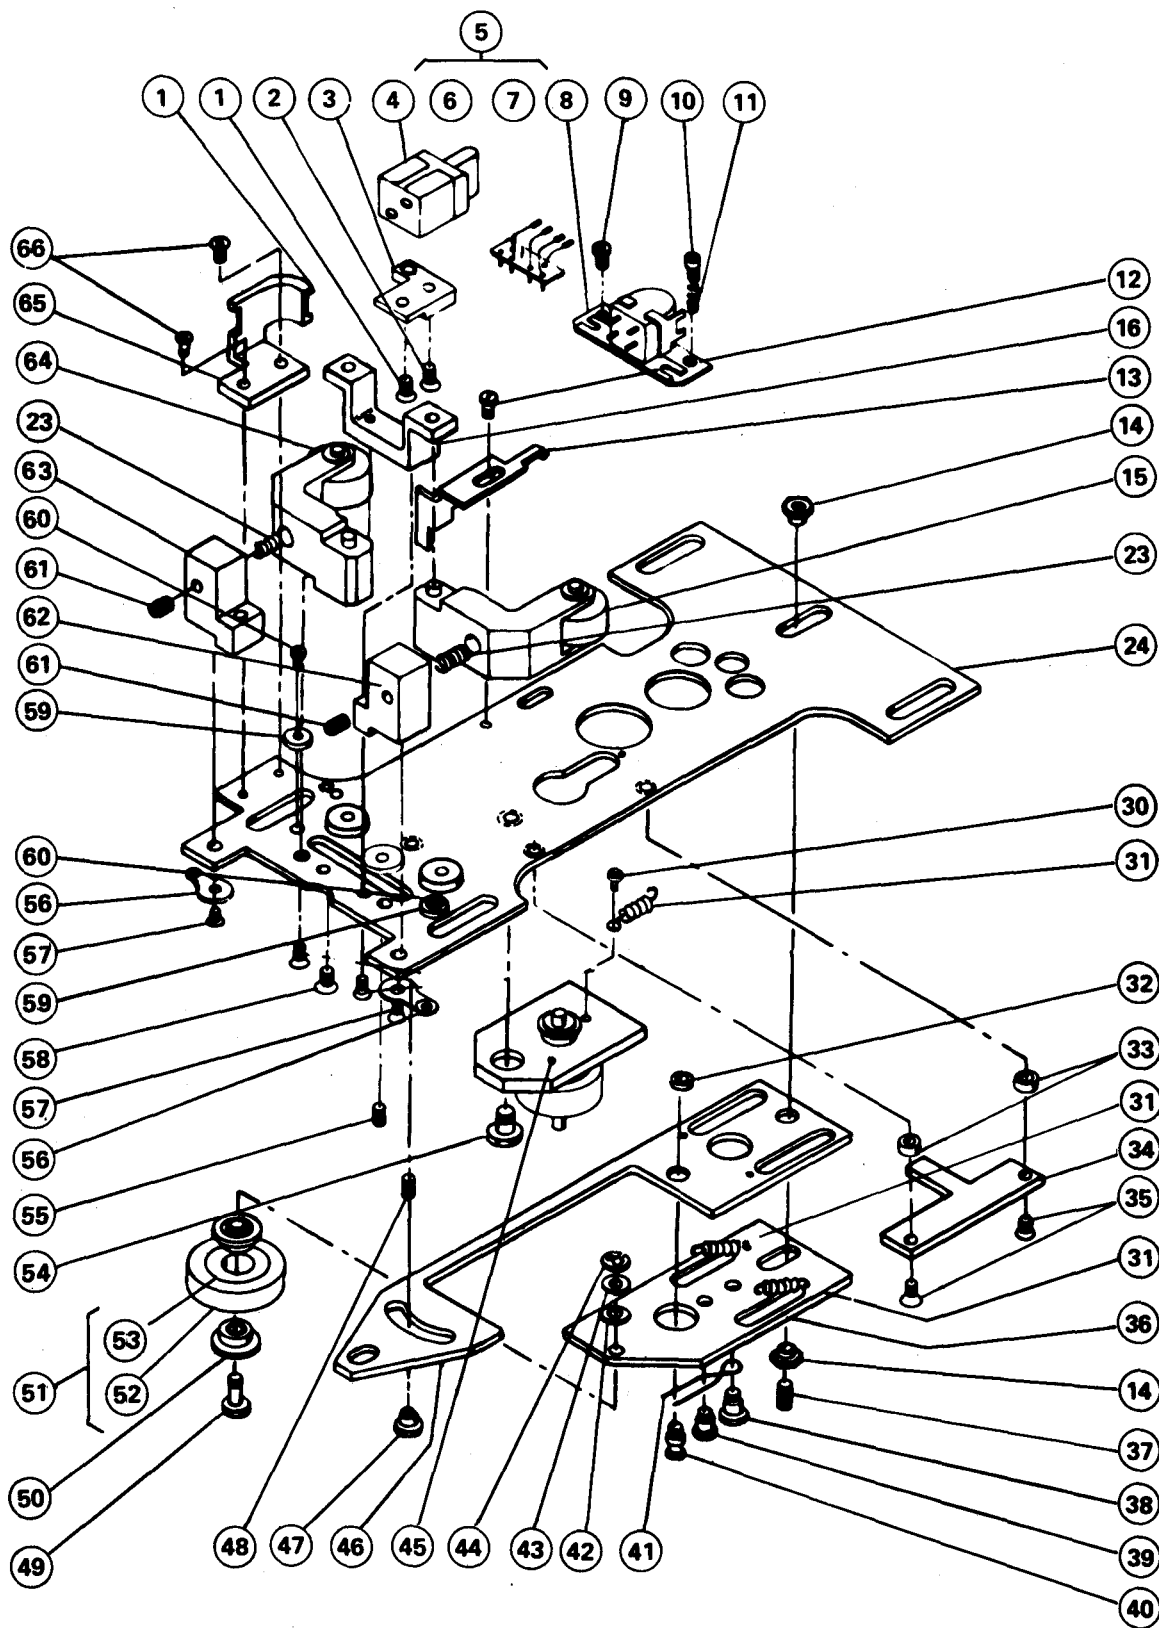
Slide plate subassembly (sheet 1 of 2)
